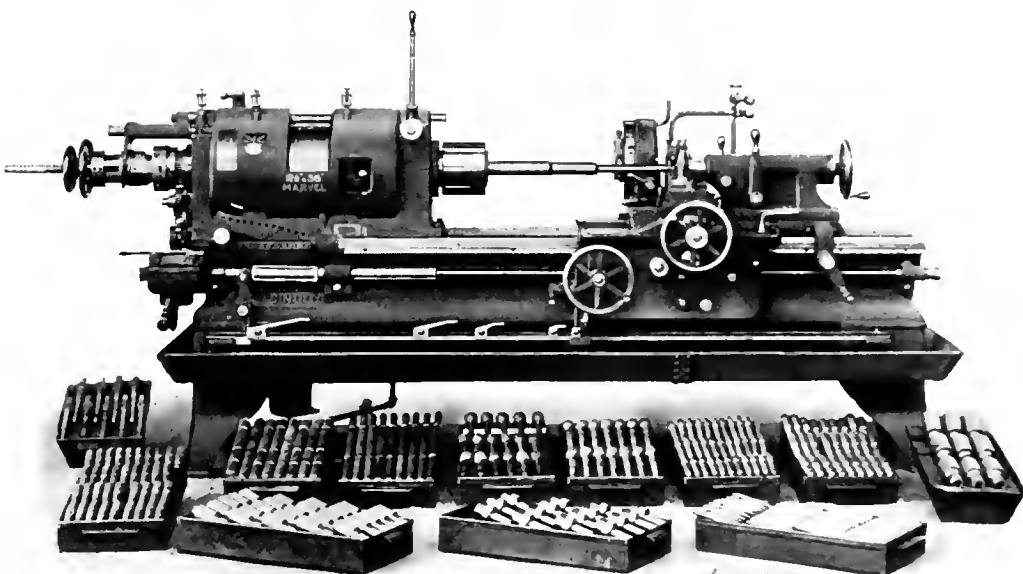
The 2½ by 36-inch Marvel Lathe with Covers Removed showing Chuck-operating Mechanism
